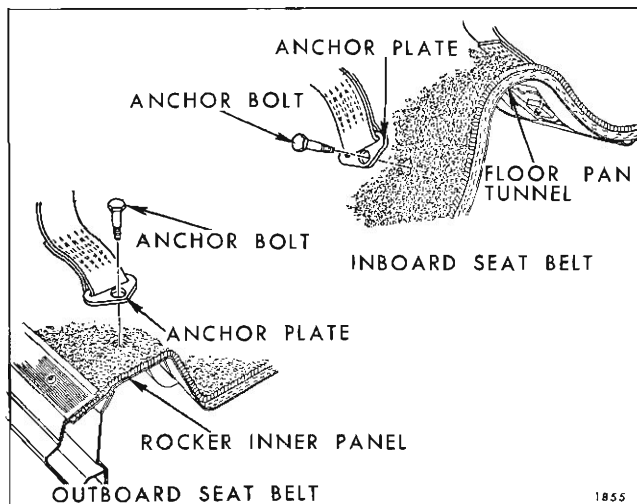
H36—Standard Seat Belt Attachments - All except 68000 Series
